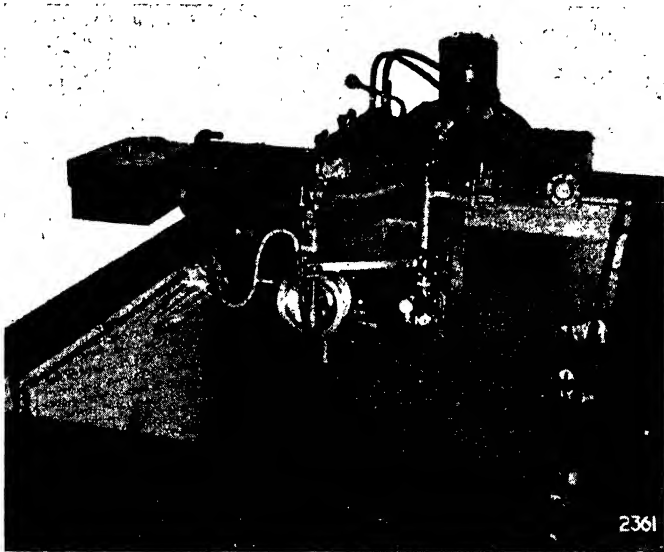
SHORTER TYPE G.2 MACHINE OPERATING HEAD MOUNTED ON CROSS CARRIAGE OVER TANK AND TRACK, SHOWING SPECIAL HEADSTOCK ARRANGEMENT FOR TURNING CYLINDRICAL WORK
